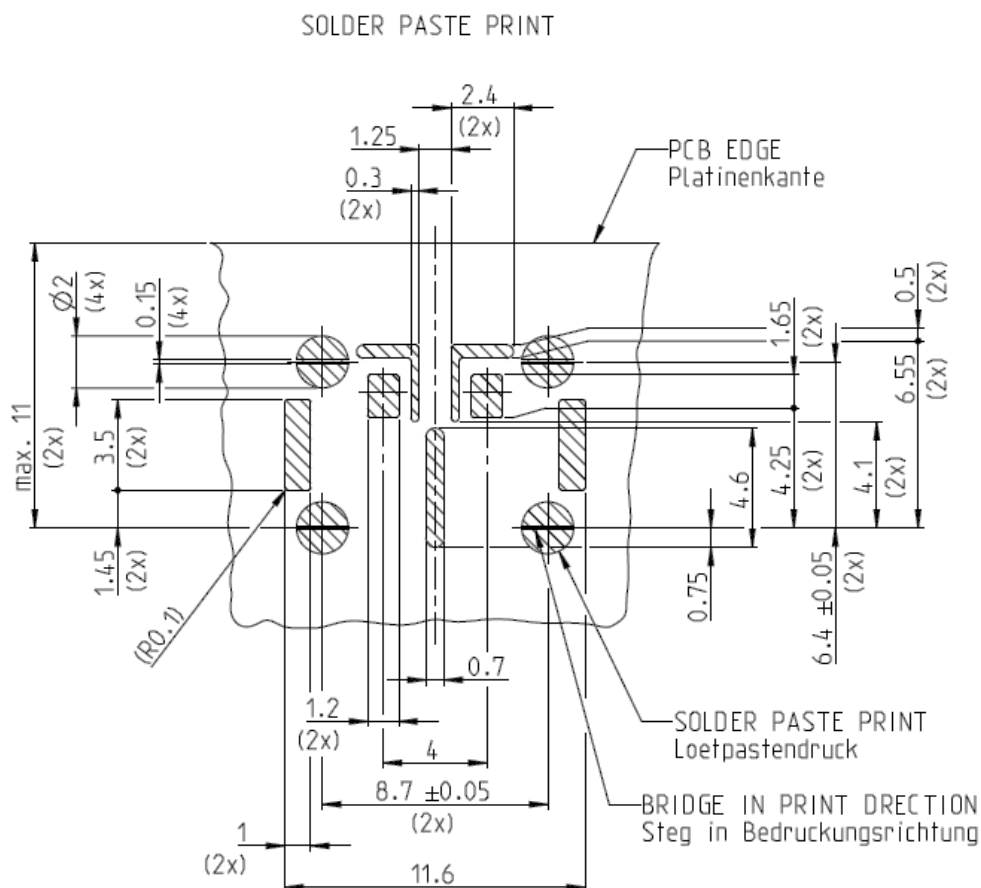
Solder paste layout for MATE-AX header 2306368
